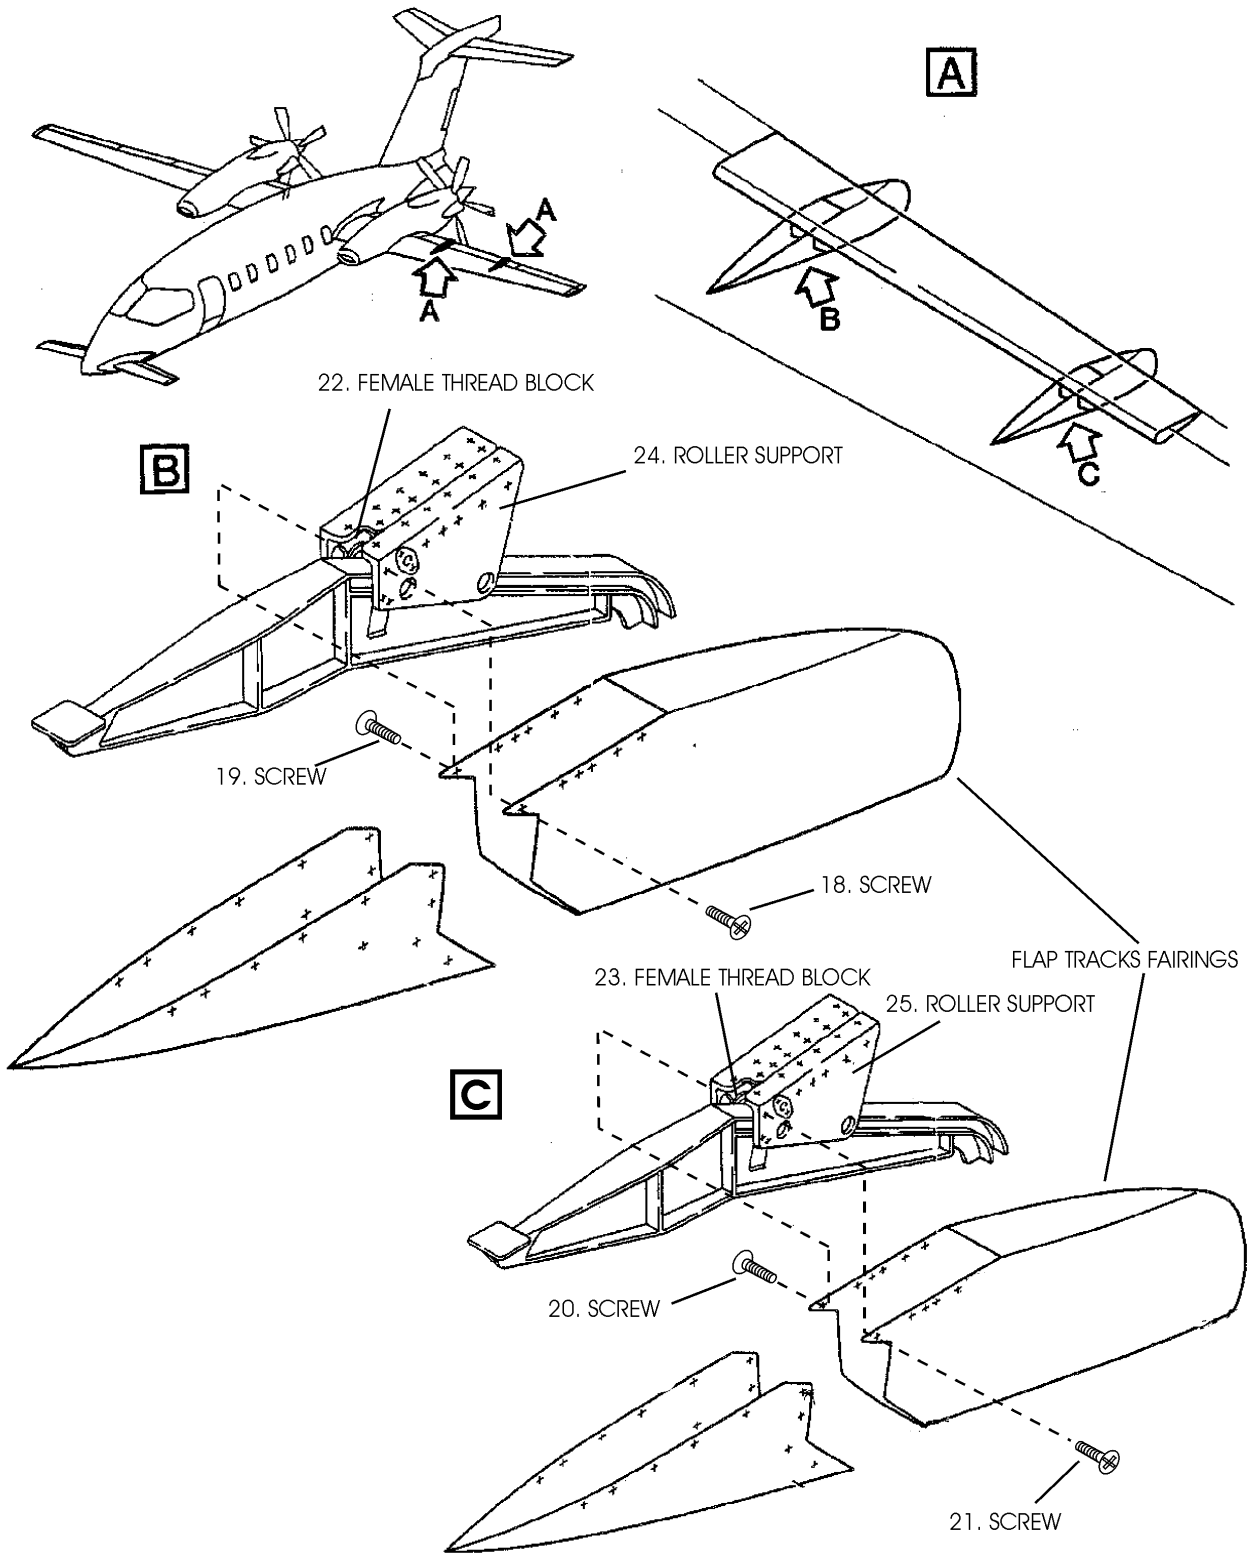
Flap Track - Removal/Installation (Sheet 2 of 2)
